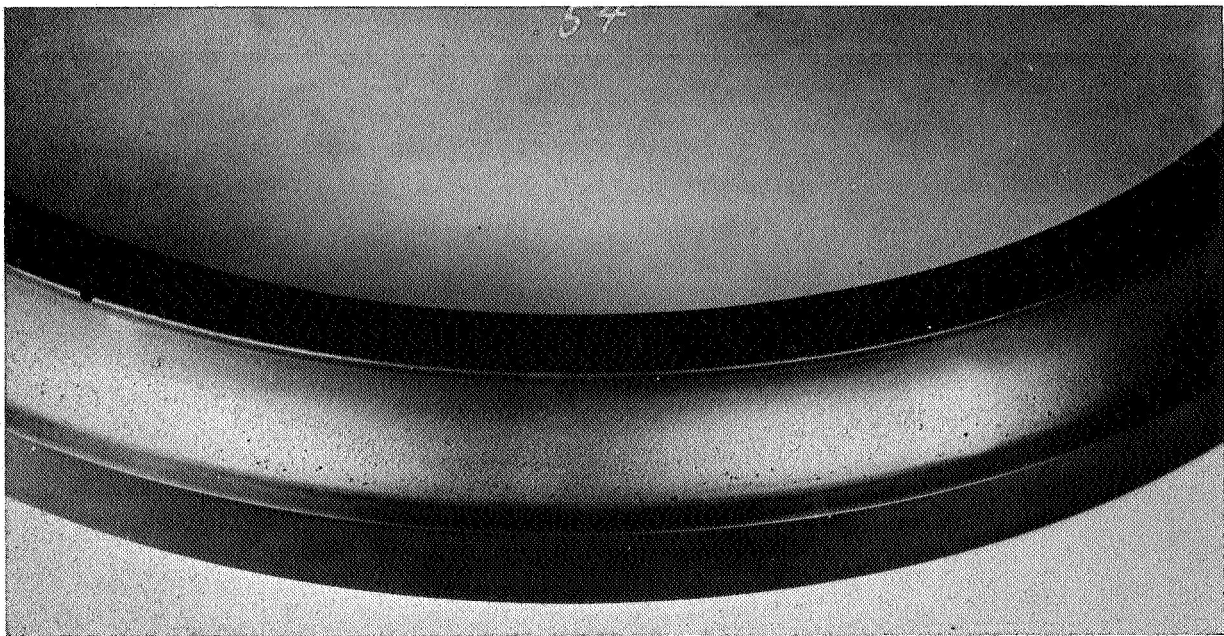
CAGE FAILURE AND BALL POCKET WEAR - BEARING S/N 54
